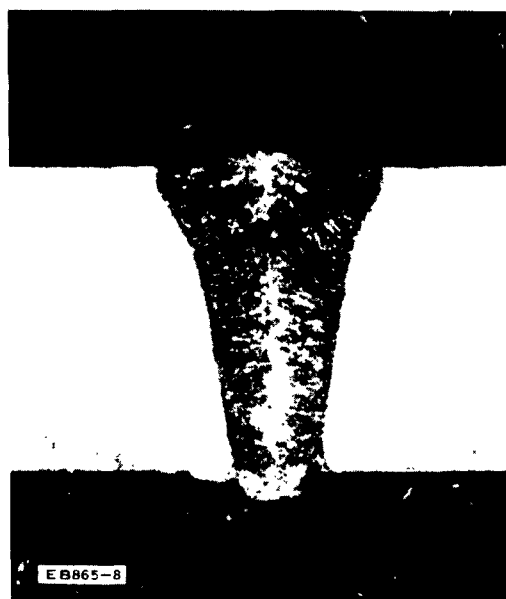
Trial Weld Cross-section; X20; 0.090-Inch D6AC; 150 KV, 10 ma, 55 ipm, 0.015-Inch Circular Oscillation
